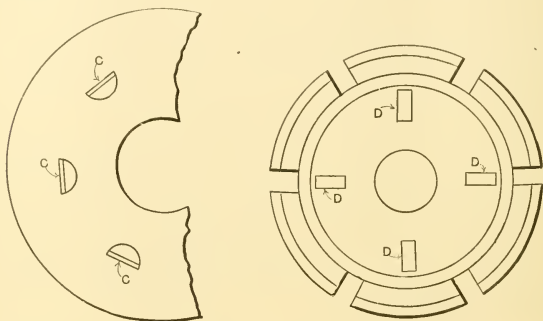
AND 3 SHOWING PROJECTIONS ON BRASS VALVE PLATE AND ON SPRING GUARD
